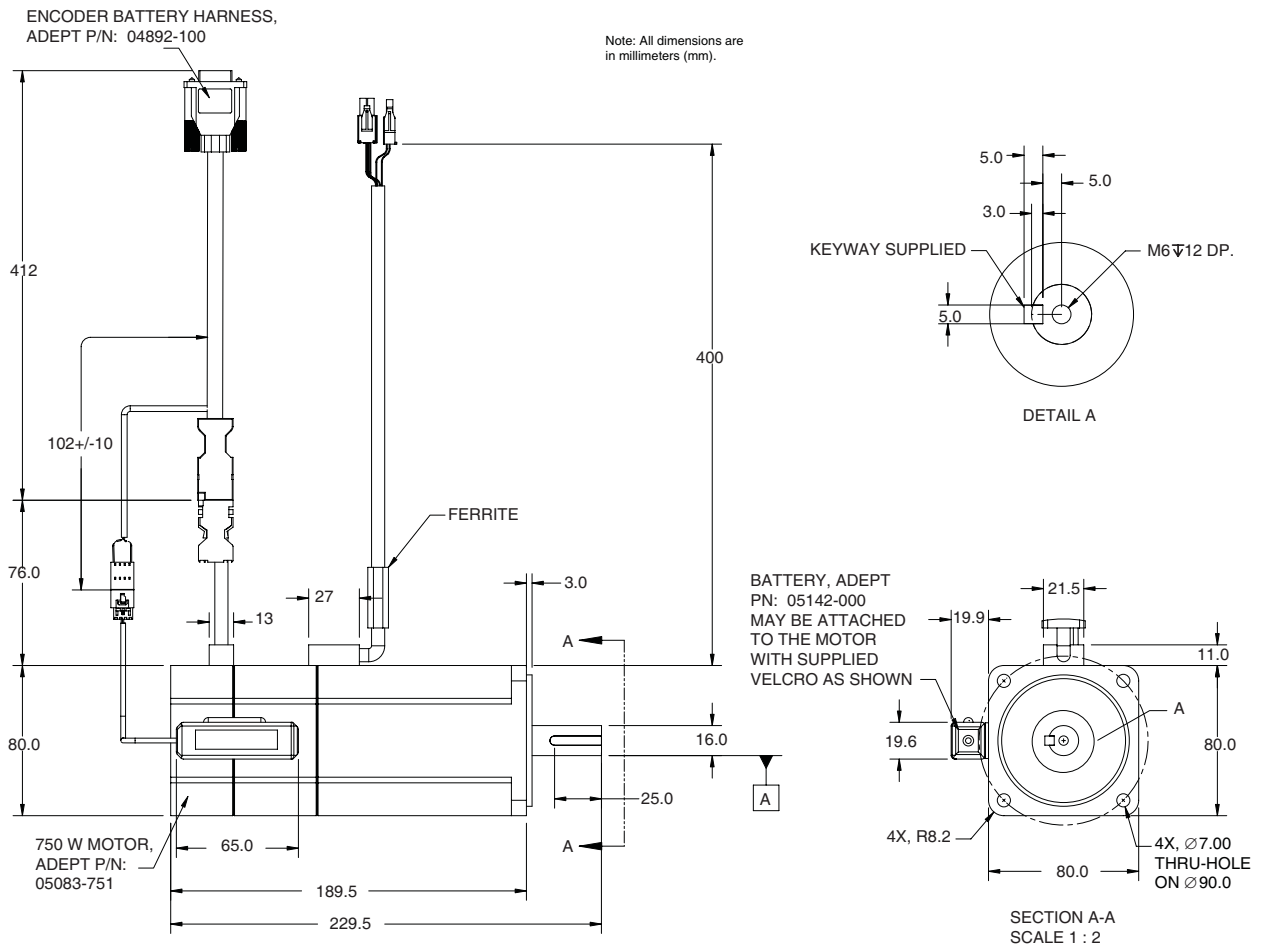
750 W Motor (with brake) Dimension Drawing
